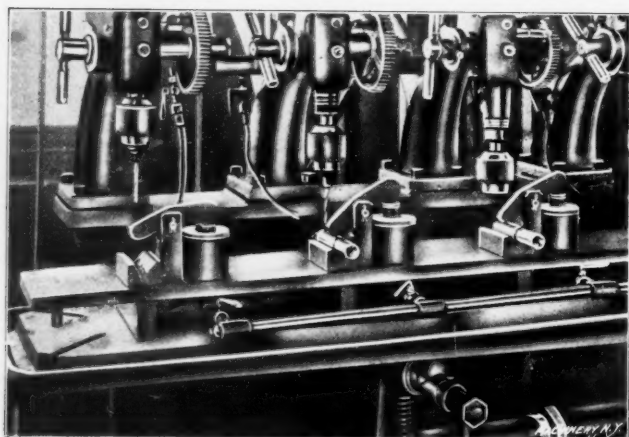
Multiple Spindle Drill Press with Pneumatic Clamps
